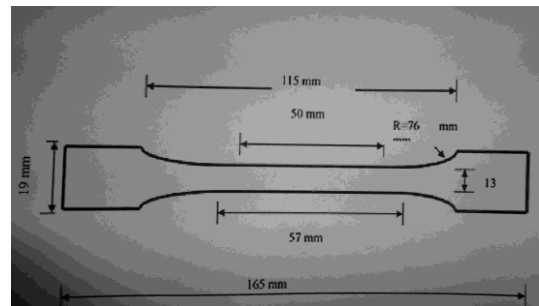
(a). Geometrical dimensions of tensile test specimen as per ASTM D638-03
